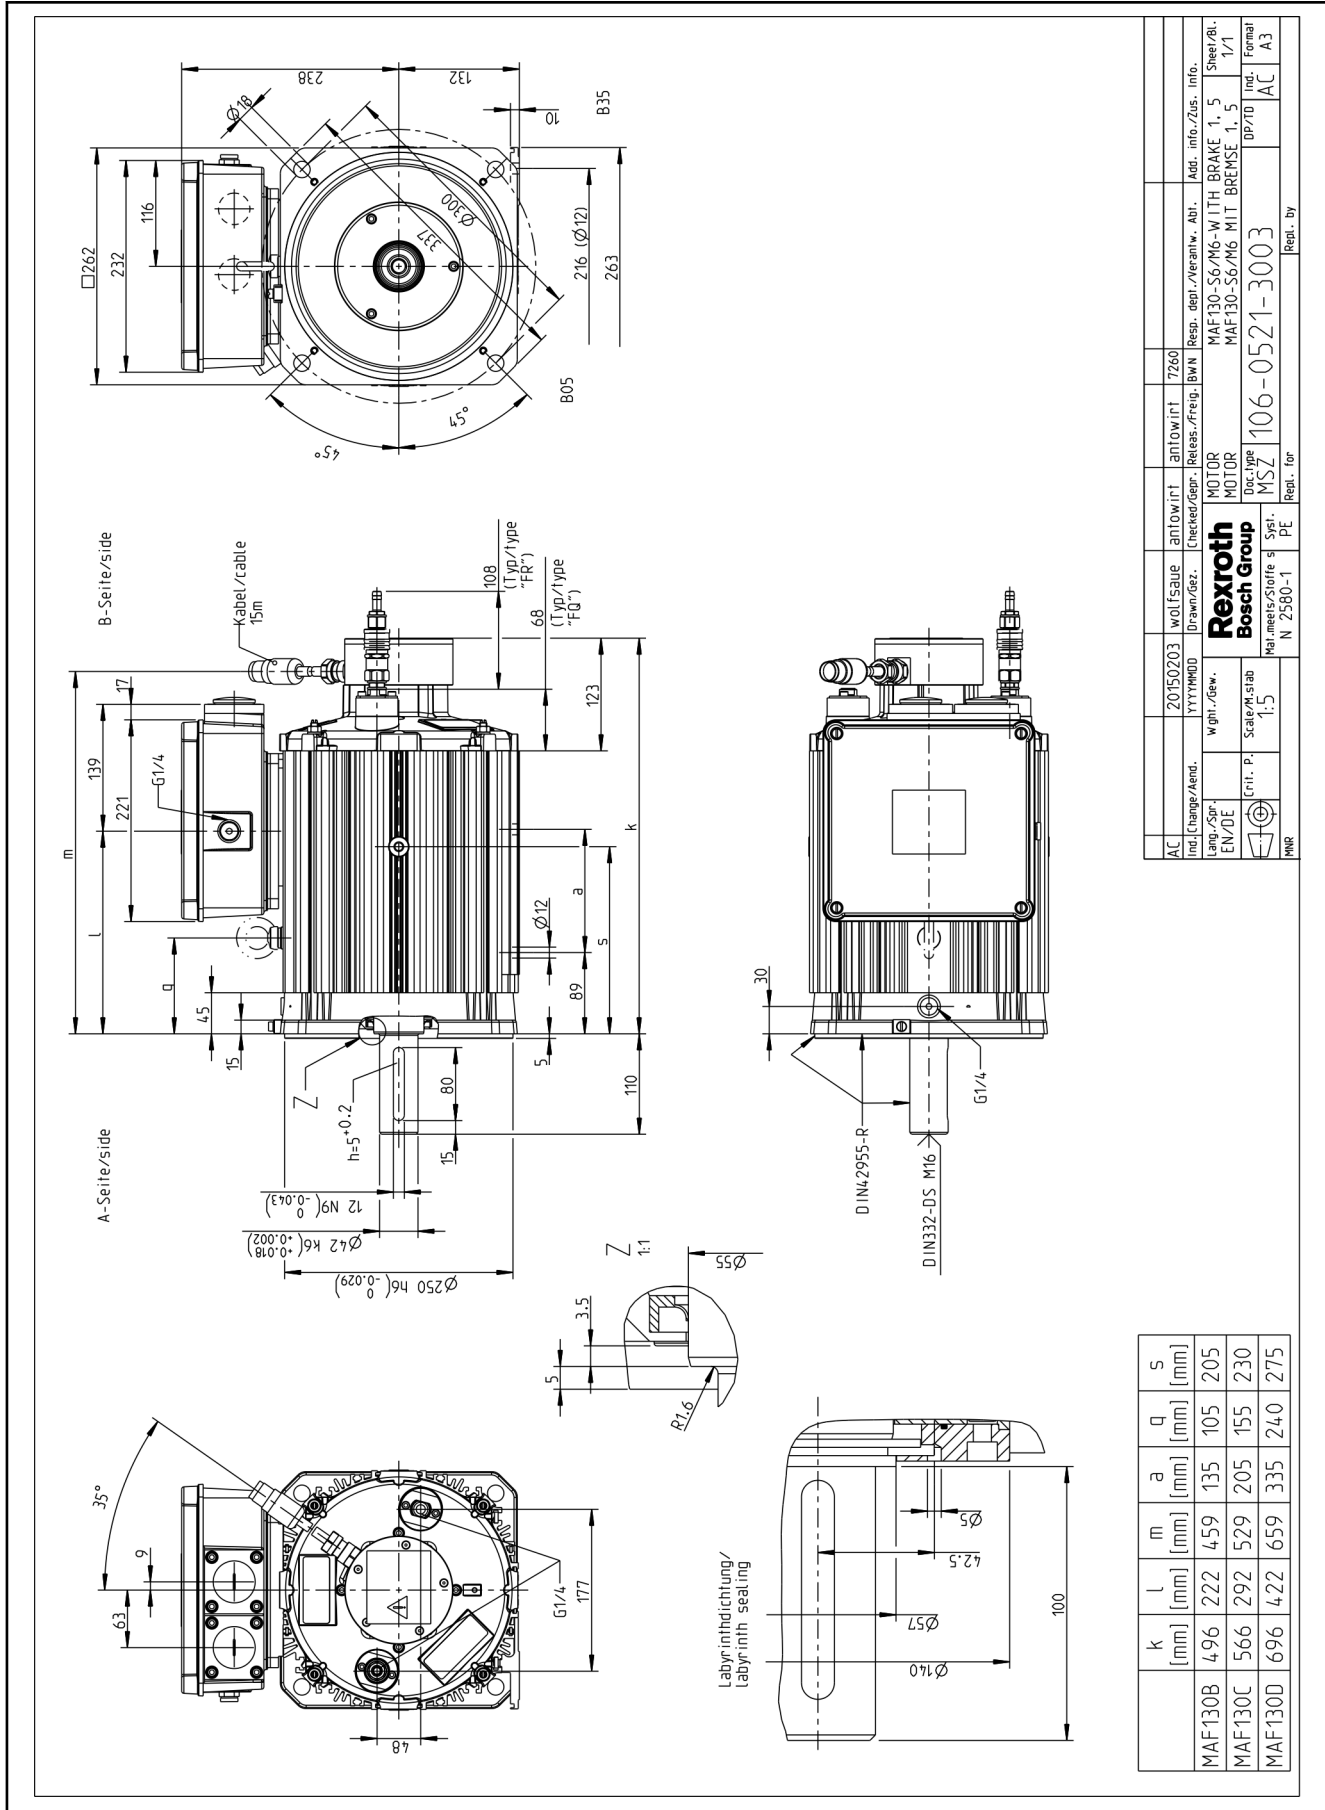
MAF130 with M6/S6 encoder, brake 1/5
